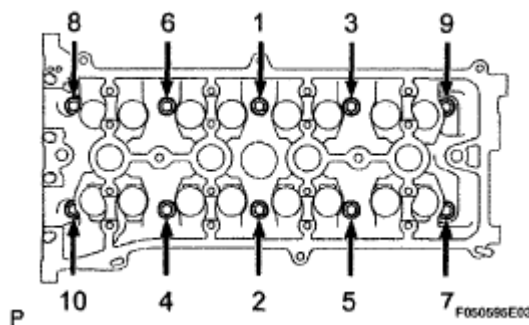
Identifying Cylinder Head Bolts Install Sequence
